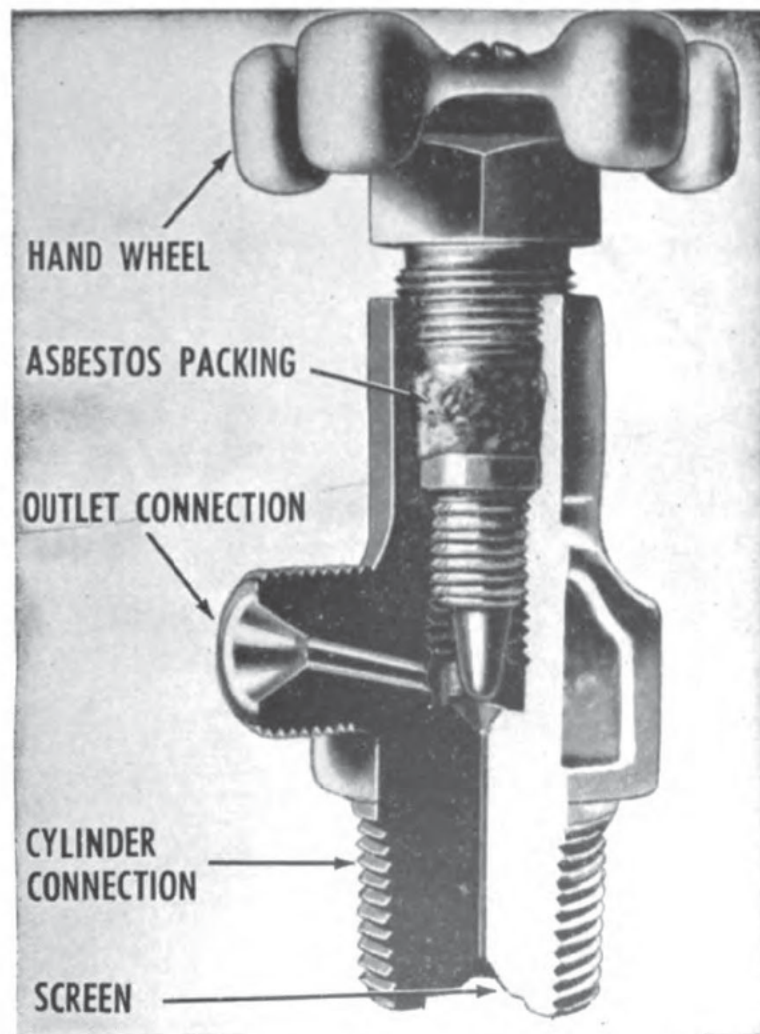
Cutaway view of an acetylene-cylinder valve, showing asbestos packing. (Some valves have wrench-operated spindles instead of hand wheels.)
